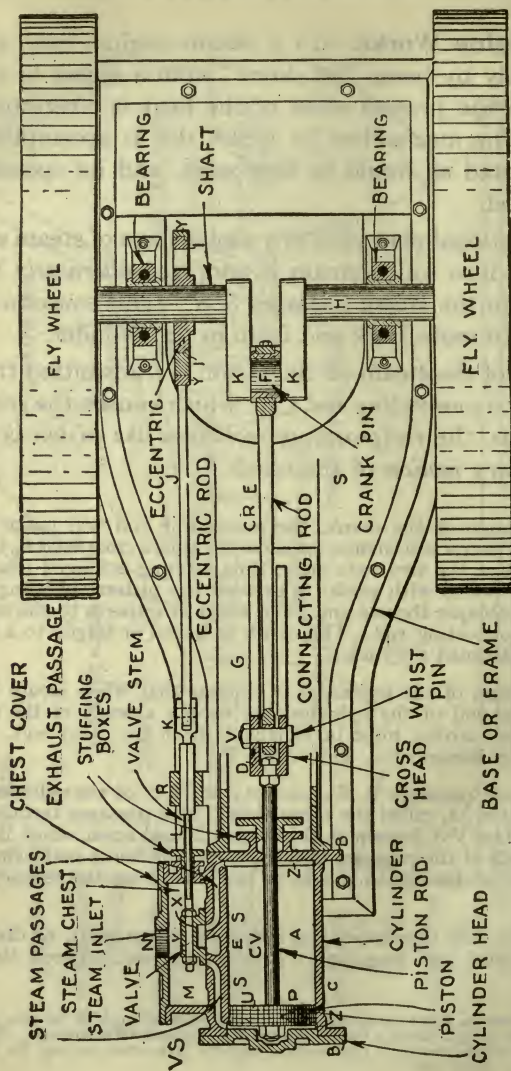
Plan showing parts of a horizontal steam engine, with names of same. The numerous parts may be classified as: 1, stationary; 2, reciprocating; 3, rotating. Thus, 1, the frame, cylinder, valve chest cover, stuffing box guides, and main bearing are *stationary parts*; 2, the piston, piston rod, cross head, wrist pin, valve, valve stem, eccentric rod, eccentric strap are *reciprocating parts*; 3, the fly wheel, shaft, eccentric, are *rotating parts*. The engine here shown may be classed as a simple slide valve horizontal engine.
